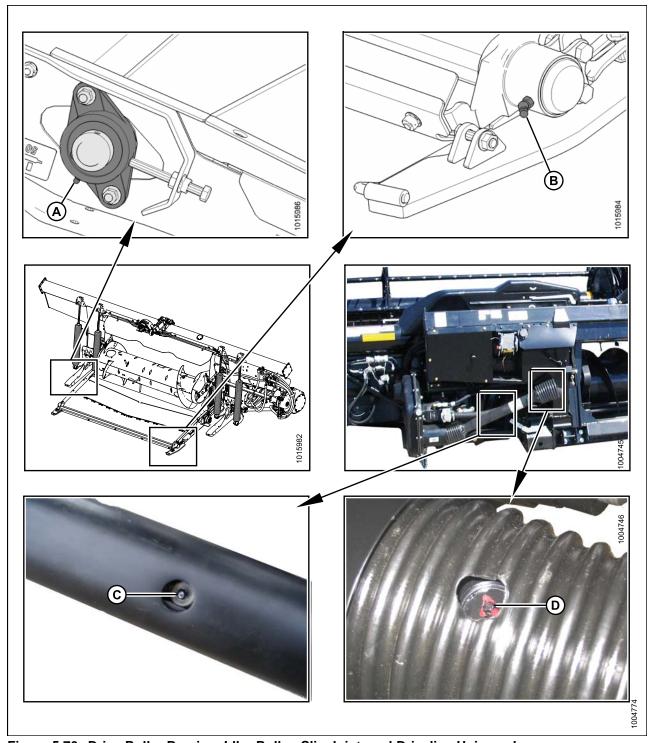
Drive Roller Bearing, Idler Roller, Slip Joint, and Driveline Universal
